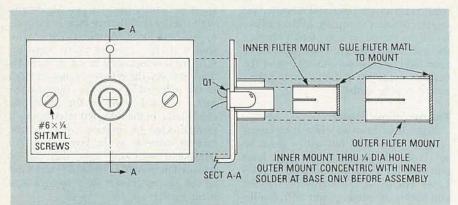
THE OPTICAL ATTENUATOR assembly fits directly over phototransistor Q1. The front is painted white to help in aiming the reflected laser beam.
